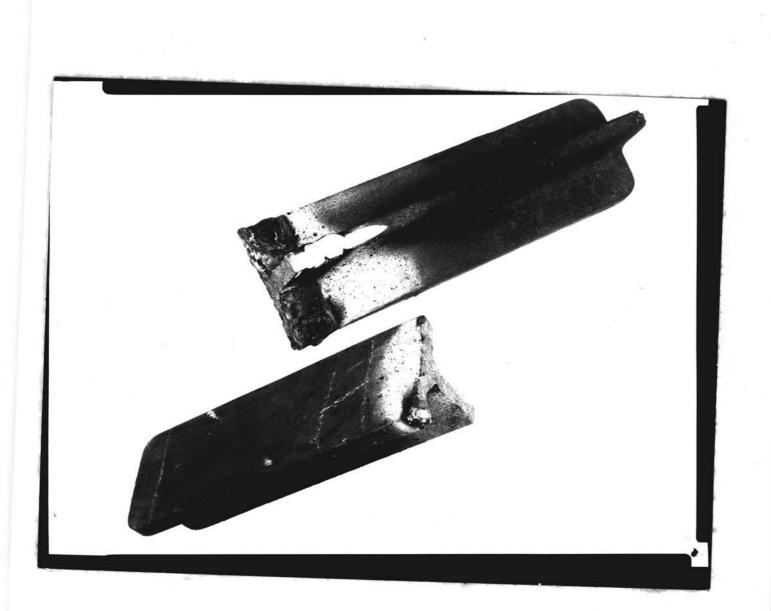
Preheated arc welded beam, fractured after welding, shows that the break occured completely out of the weld. minutes in twenty per cent nital solution. The specimens were placed under a microscope for visual examination. Photomicrographs were then taken at magnifications of two hundred diameters on Bosch and Lomb Bench photomicrographic equipment (Figure 7) using Wratten M metallographic plates.
